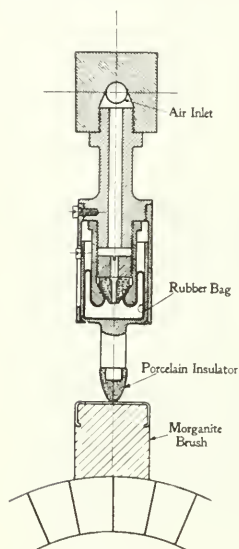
LONGITUDINAL SECTION THROUGH PNEUMATIC BRUSH HOLDER (MORGAN CRUCIBLE COMPANY)
